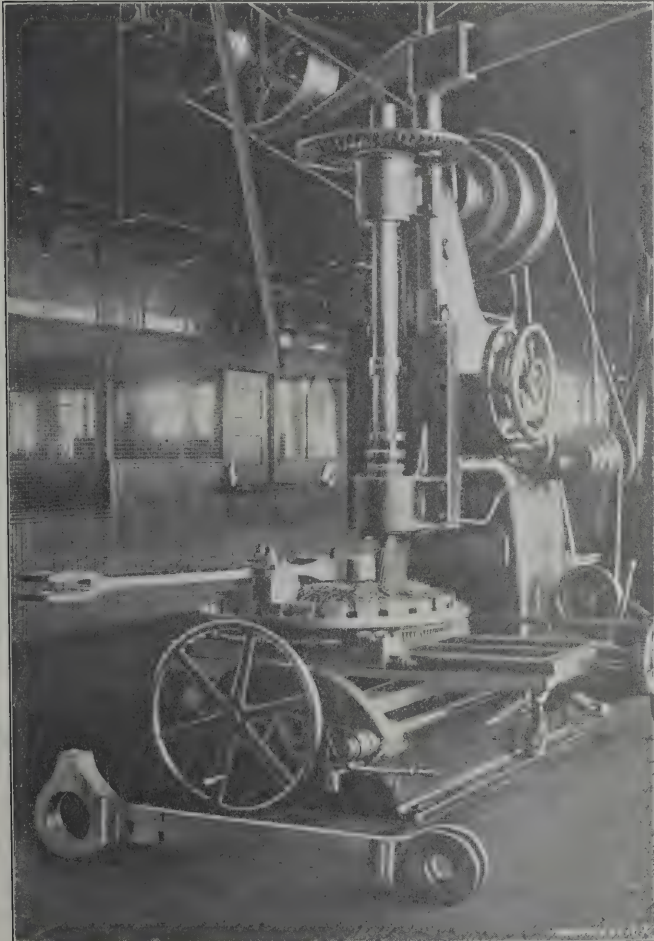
Machining Circular Outlines of the End Rod on the Vertical Milling Machine with Rotary Table
